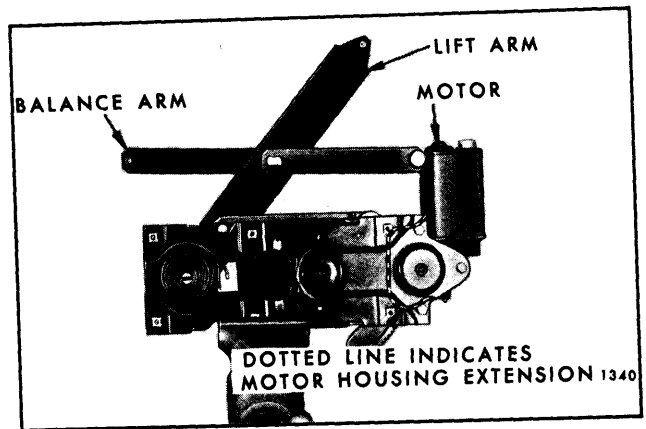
Door Window Regulator and Electric Motor Assembly
